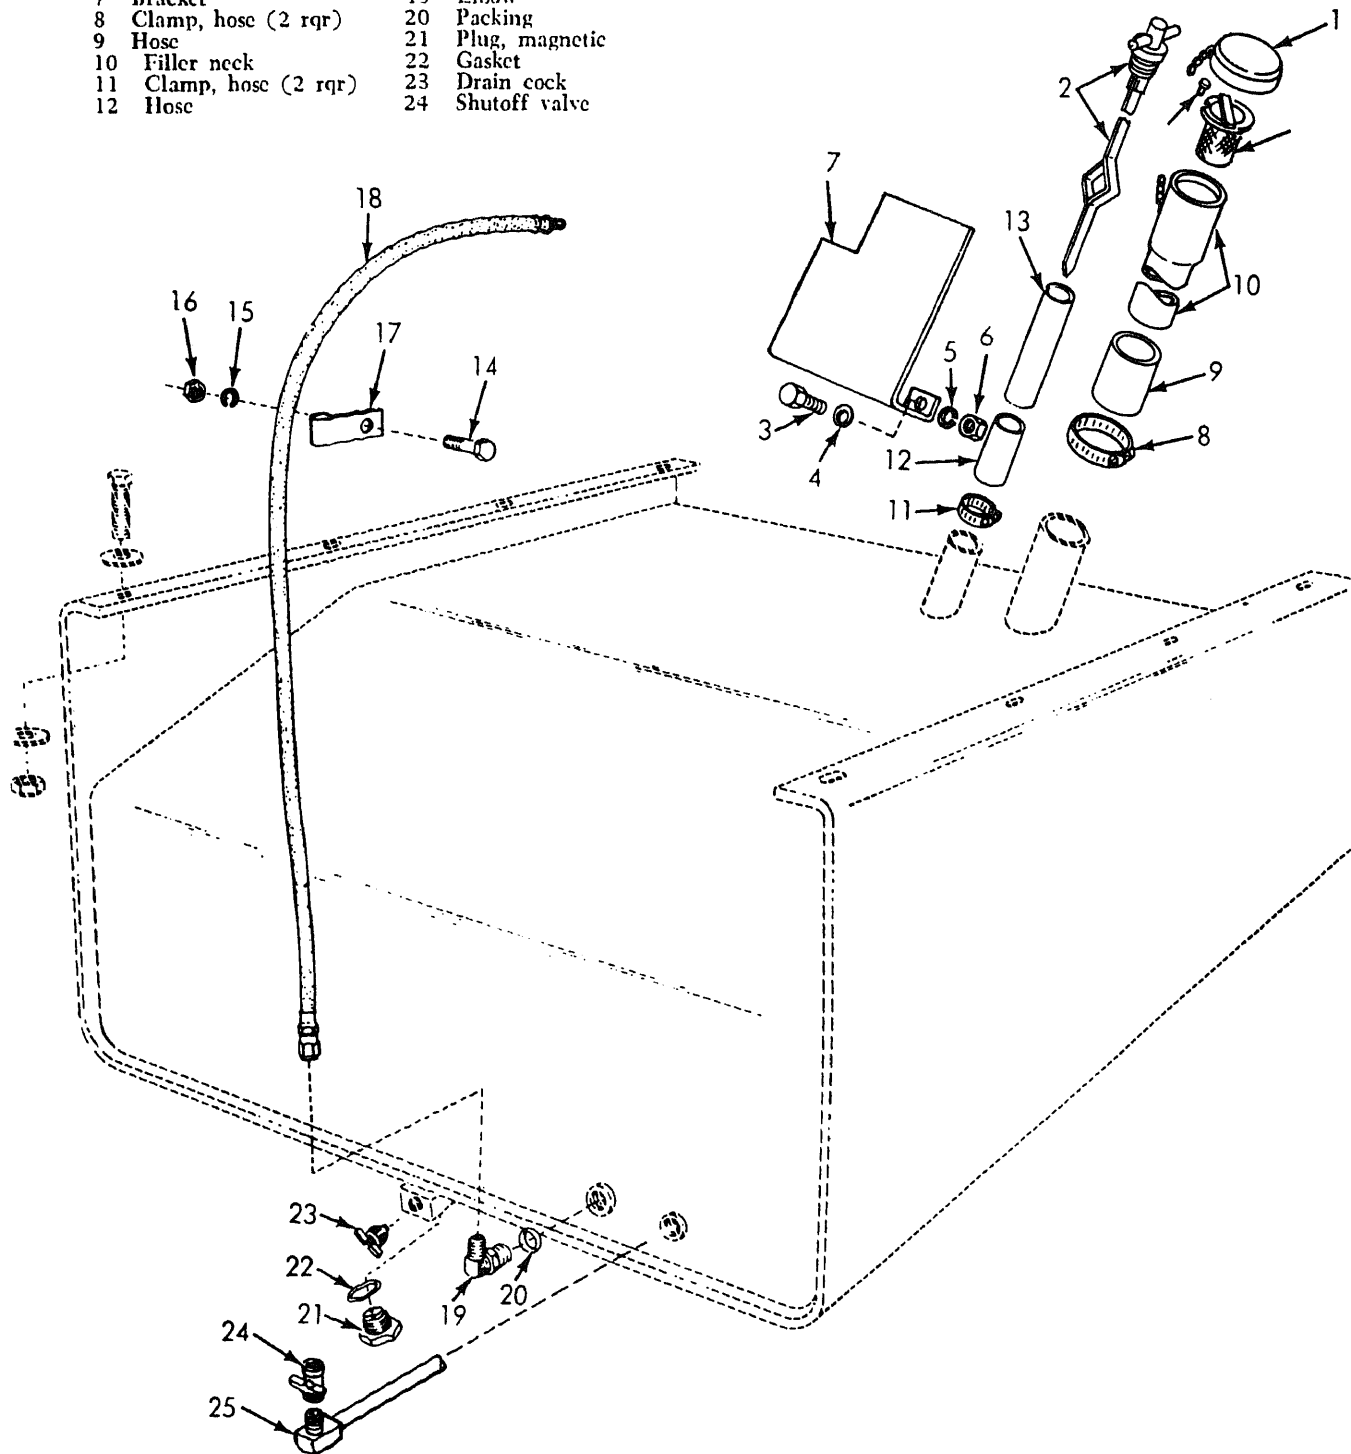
Fuel tank lines and fittings, removal and installation.
